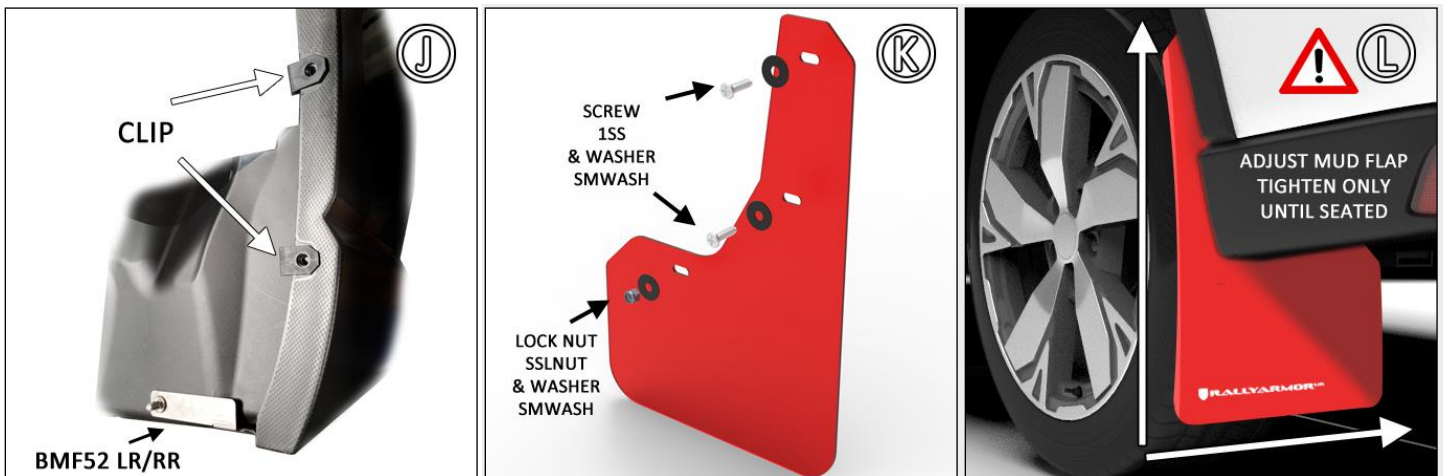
FIGURE J Install CLIP POLCLP over both mounting points on bumper.
